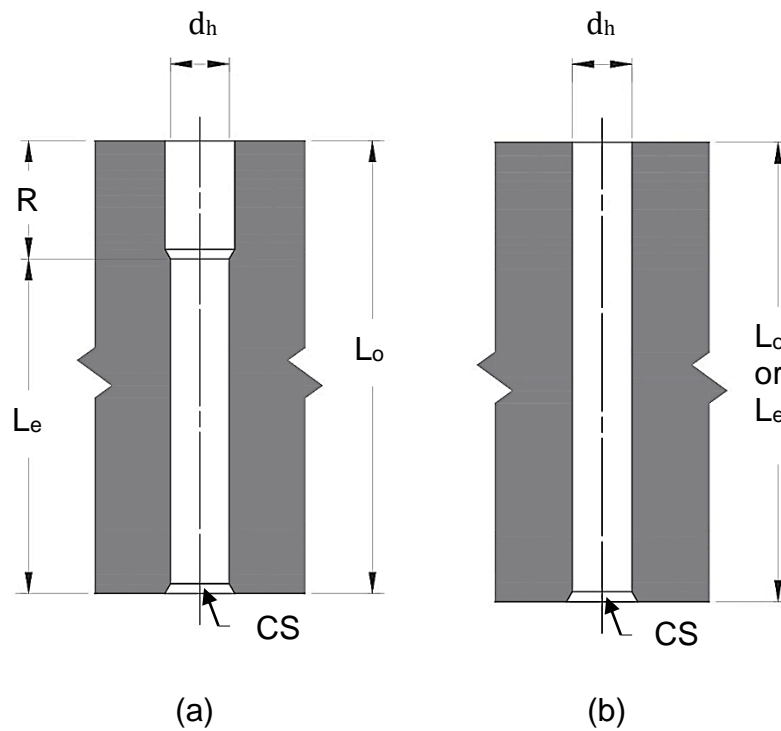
Dimensions of (a) relieved and (b) straight die holes
